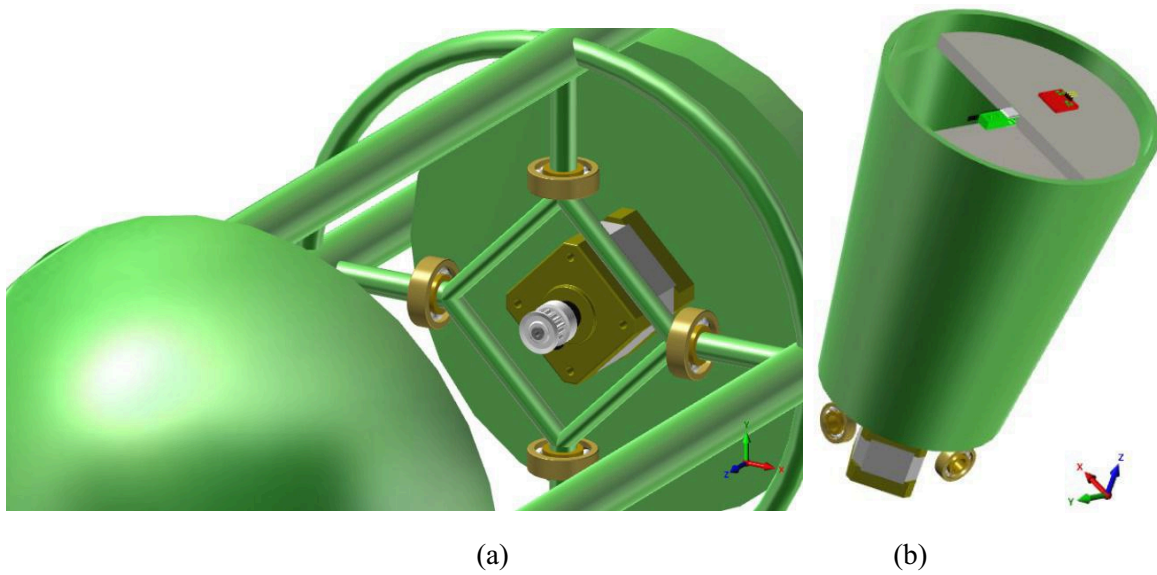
(a) Stepper motor's fixation, (b) Mobile part of the recycling machine.
